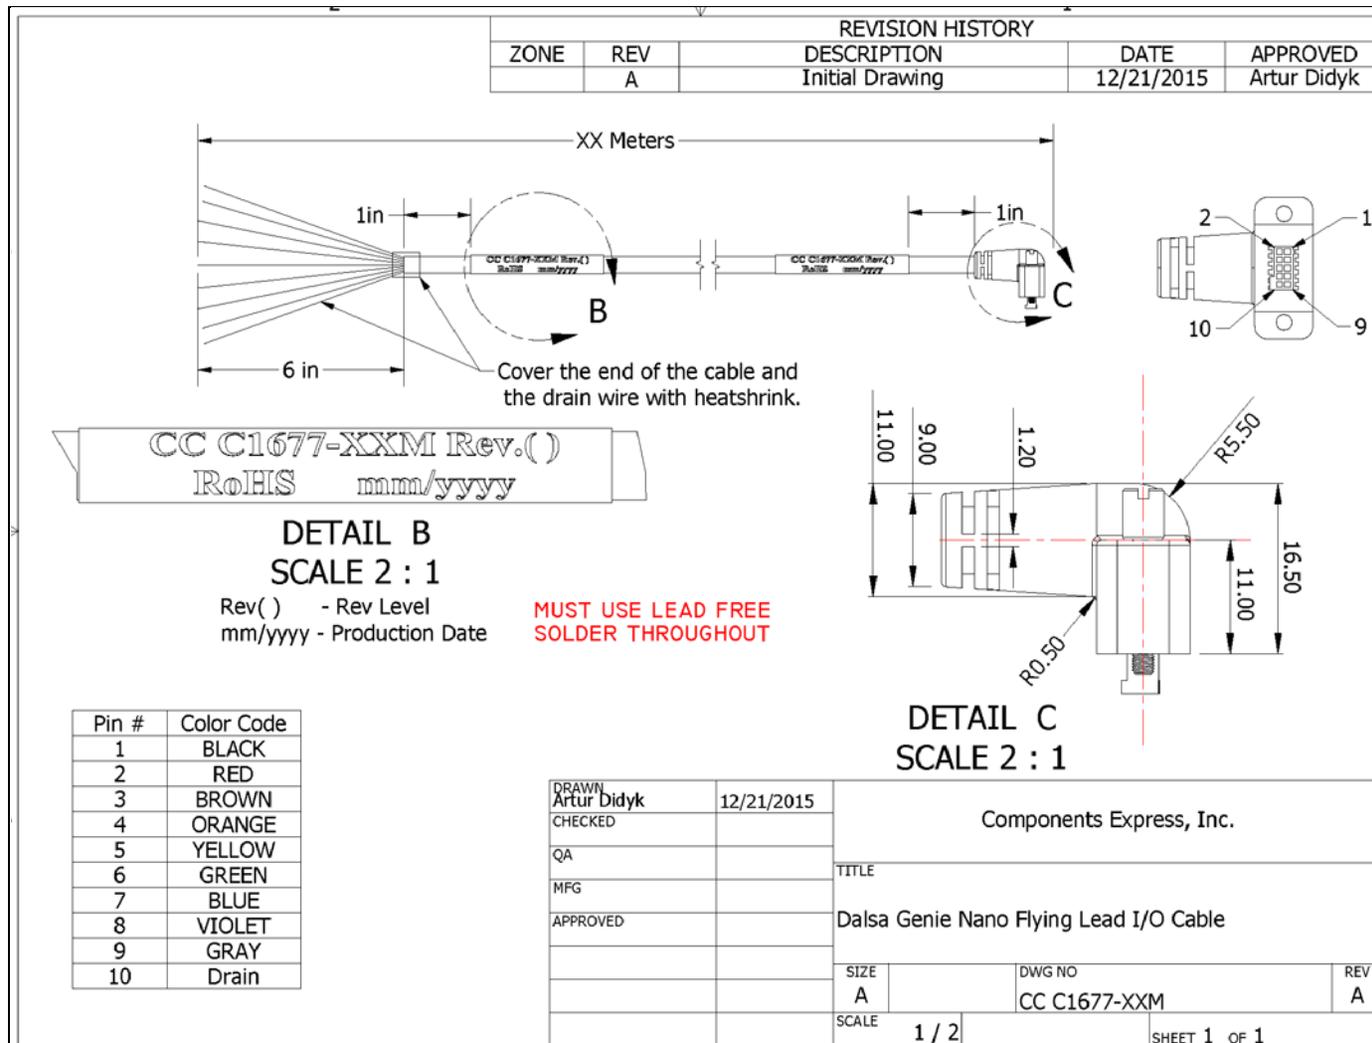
Cable Assembly: Right-Angle I/O Bunt End
